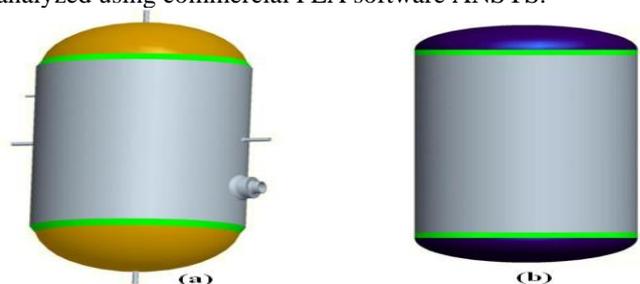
Pressure Vessel head and cylindrical shell juncture
